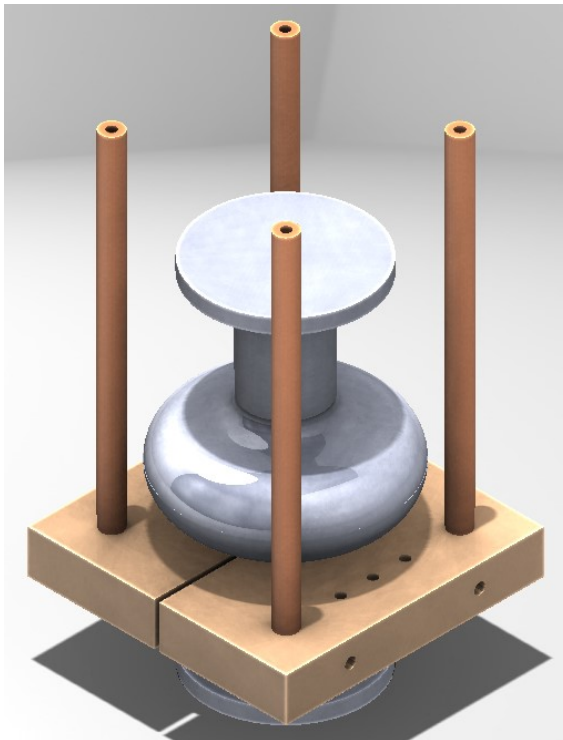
3-dimensional drawing of the 2.2 GHz Nb cavity (silver) and the copper support structure (orange).
